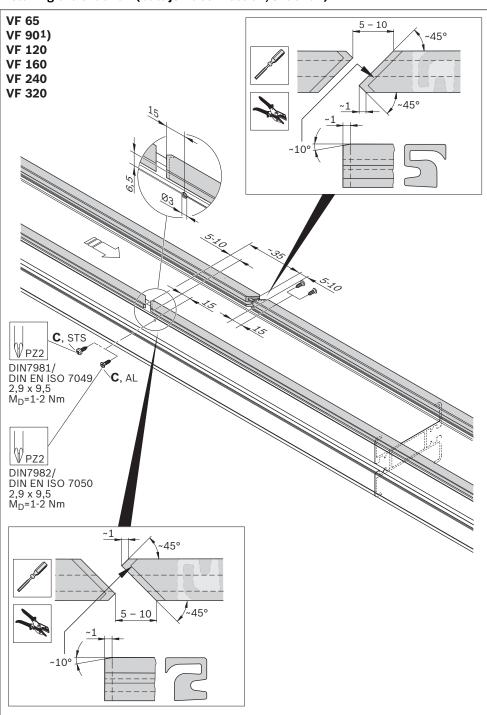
Installing the slide rail (butt joint connection, slide rail)
